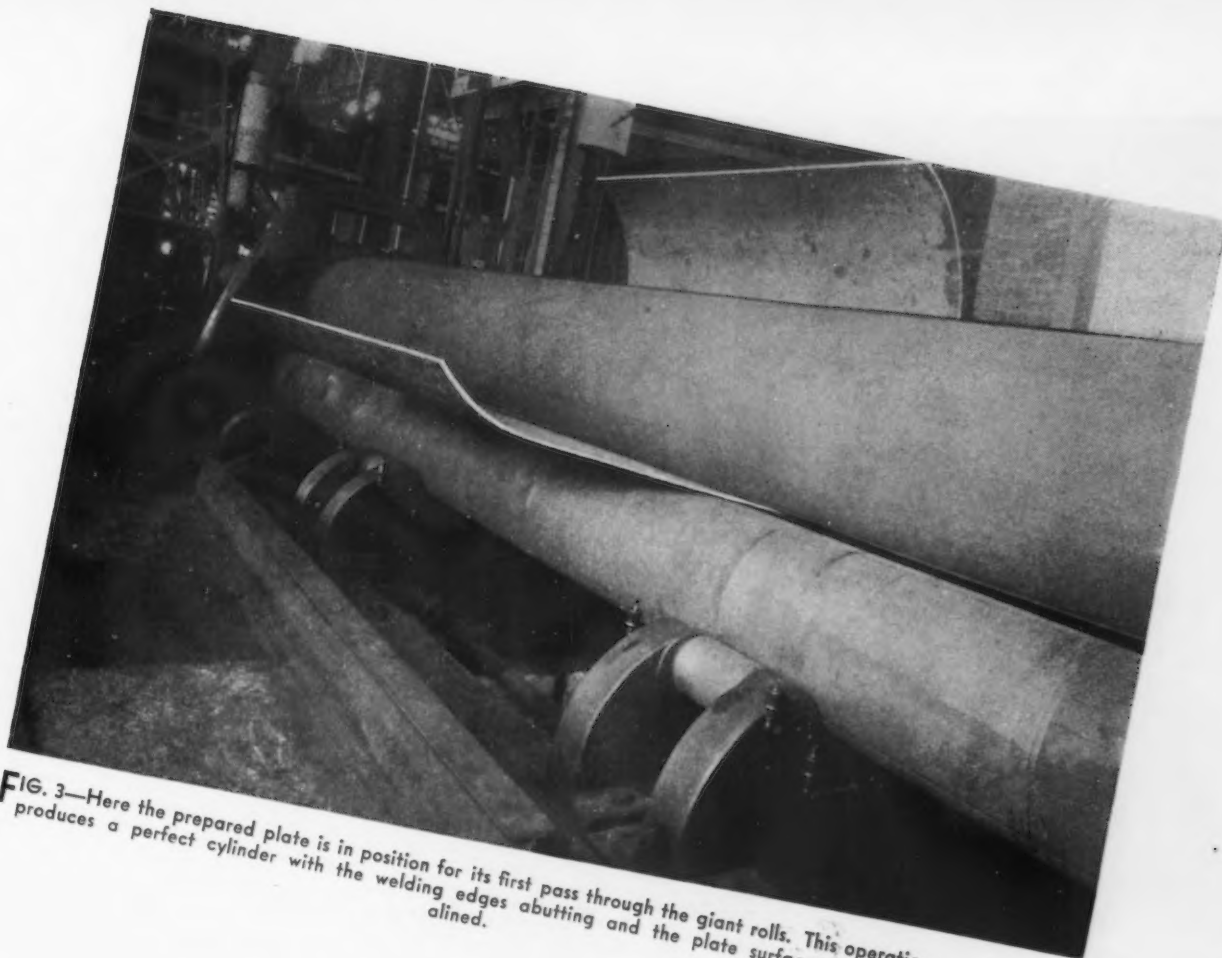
Here the prepared plate is in position for its first pass through the giant rolls. This operation produces a perfect cylinder with the welding edges abutting and the plate surfaces accurately aligned.
